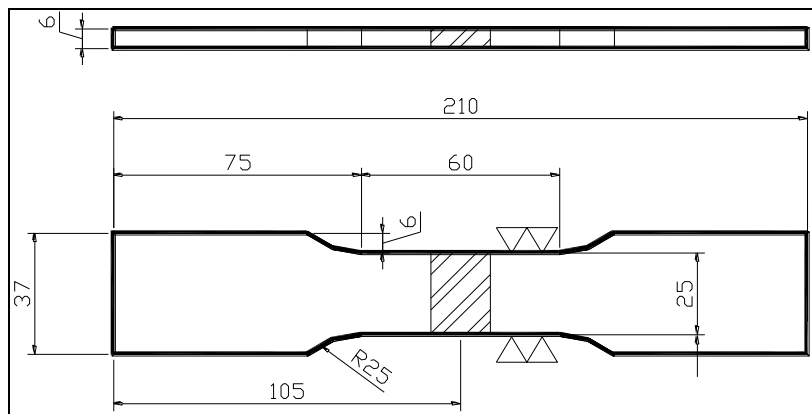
22. Dimensions of the FSW tensile test specimens
